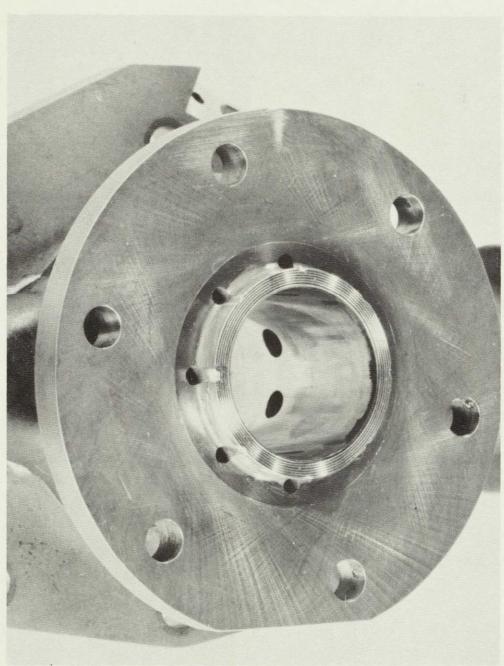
Modification 1 Piston Assembly Used in the SPU-3 Engine, After Test
